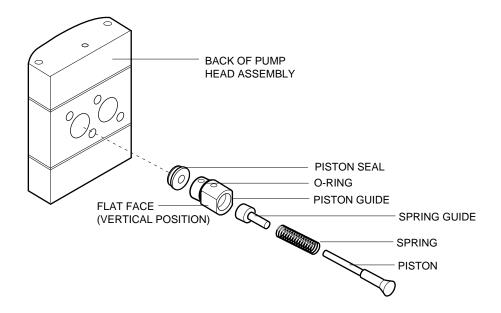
Piston Assembly and Access to the Piston Seal (view showing the back of the Pumphead Module)
